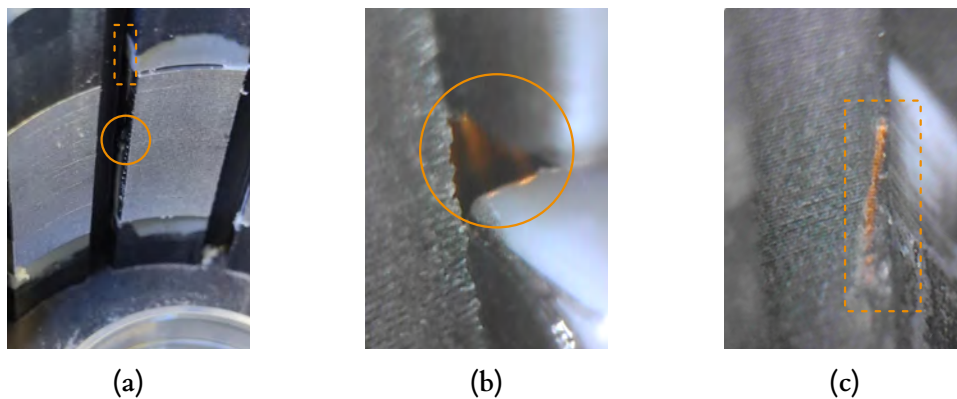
Examples of potting defects identified in the in-housing potting process (a) failure locations, (b) lack of potting in the winding and gap between the caps, and (c) non-impregnated winding wires.
